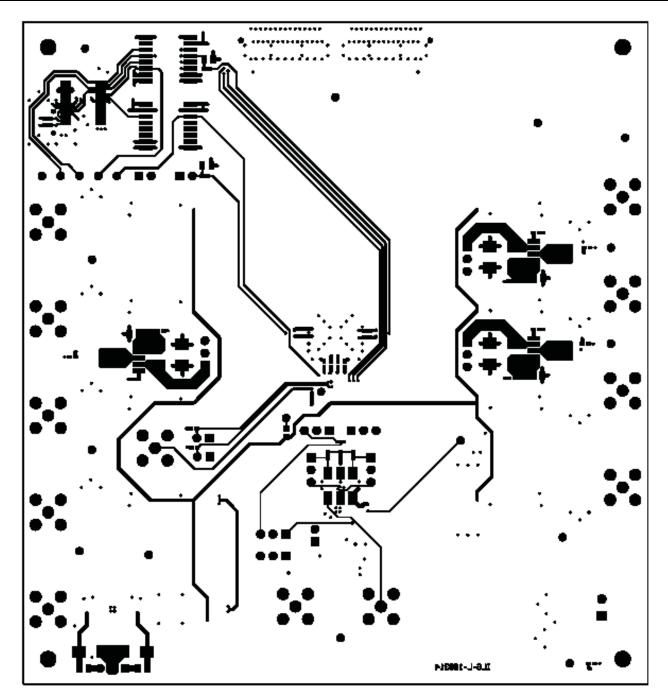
ADS5292EVM Bottom Layer Copper – Top View
